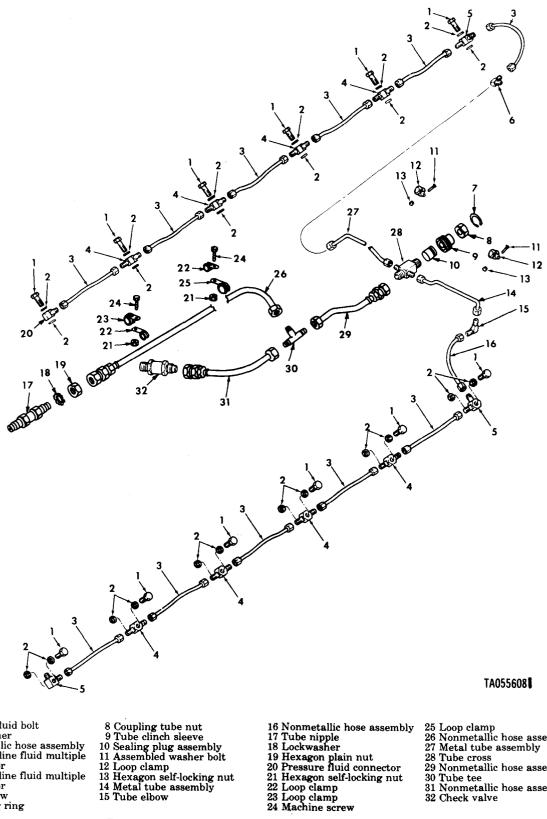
Fuel injector and nozzle fuel return hoses – exploded view, model AVDS-1790-2C and AVDS-1790-2D engines.
